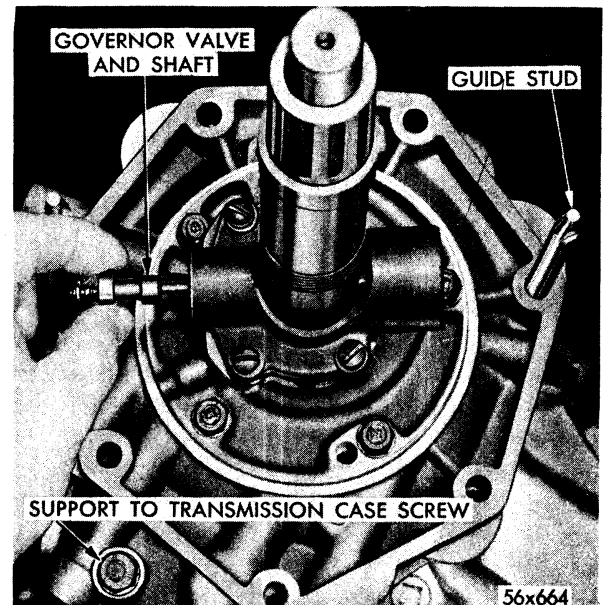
Removal and Installation of Governor Valve Shaft and Valve
